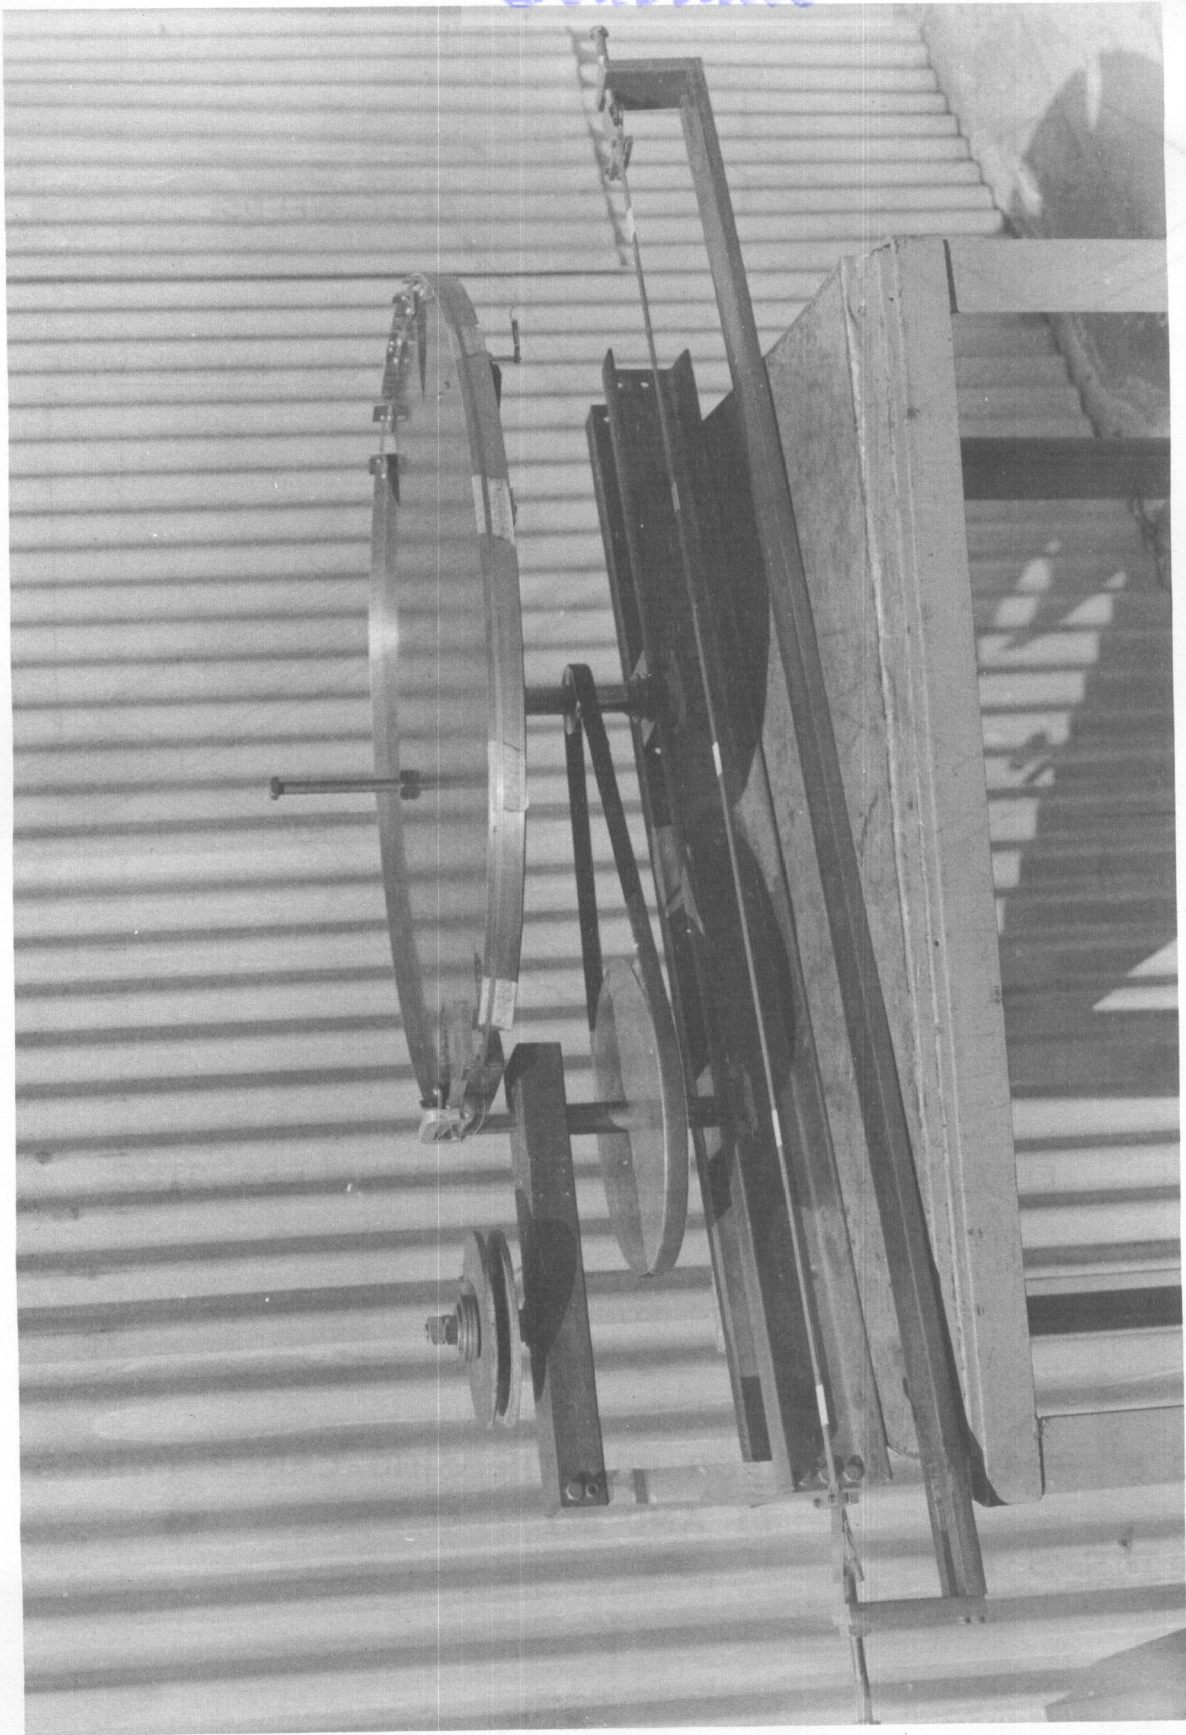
CABLE WRAPPING JIG (WING TYPES III AND IV)
